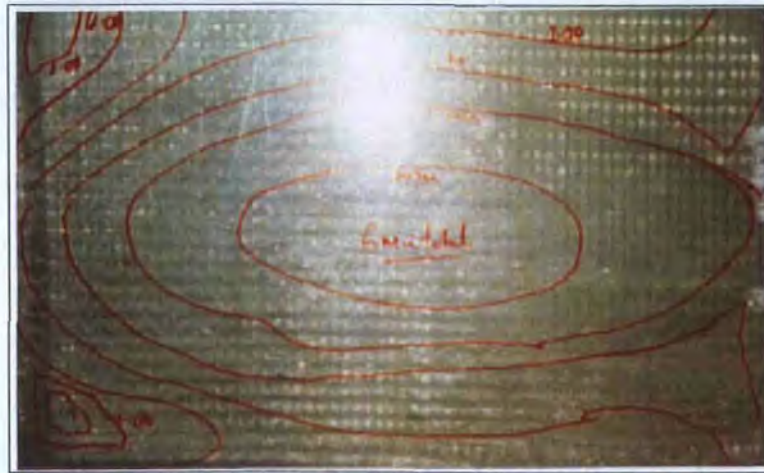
Coupon 9 after injection and subsequent removal from the mould.
